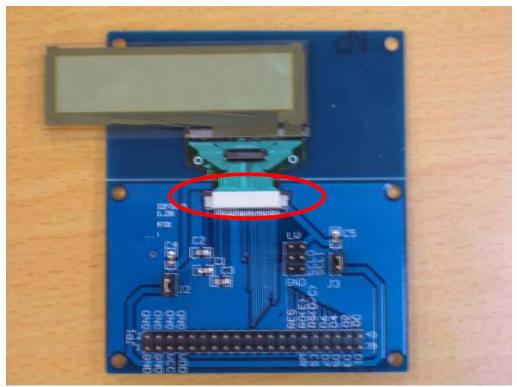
the DD-12833BE-1A and EVK assembled (Top view)
